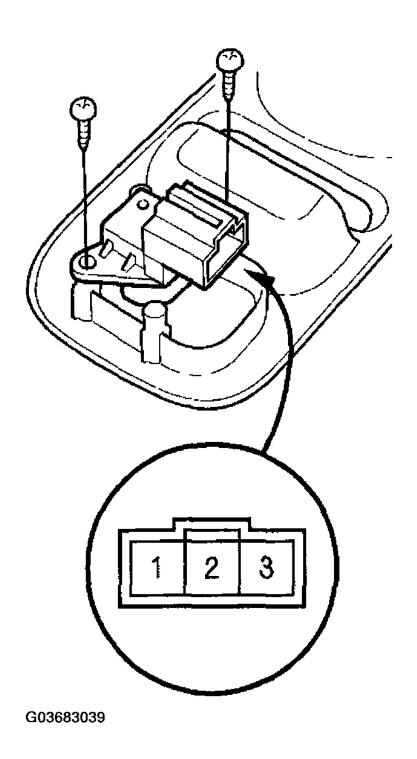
Disconnecting 3P Connector From Switch Courtesy of AMERICAN HONDA MOTOR CO., INC.
